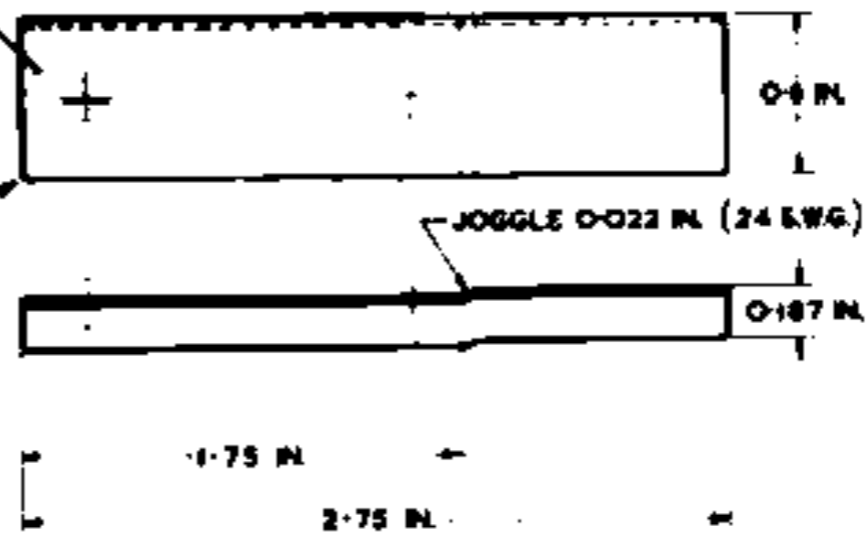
Method of repairing cracked diaphragms - end rib assembly of inboard elevators
